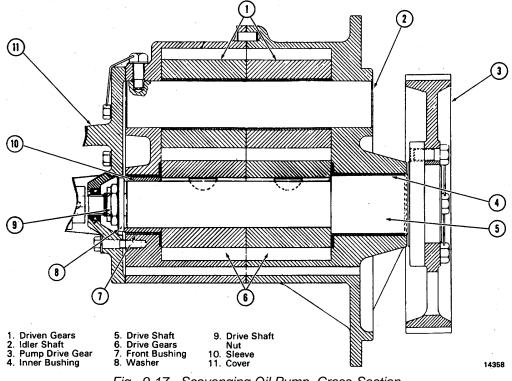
Scavenging Oil Pump, Cross-Section
